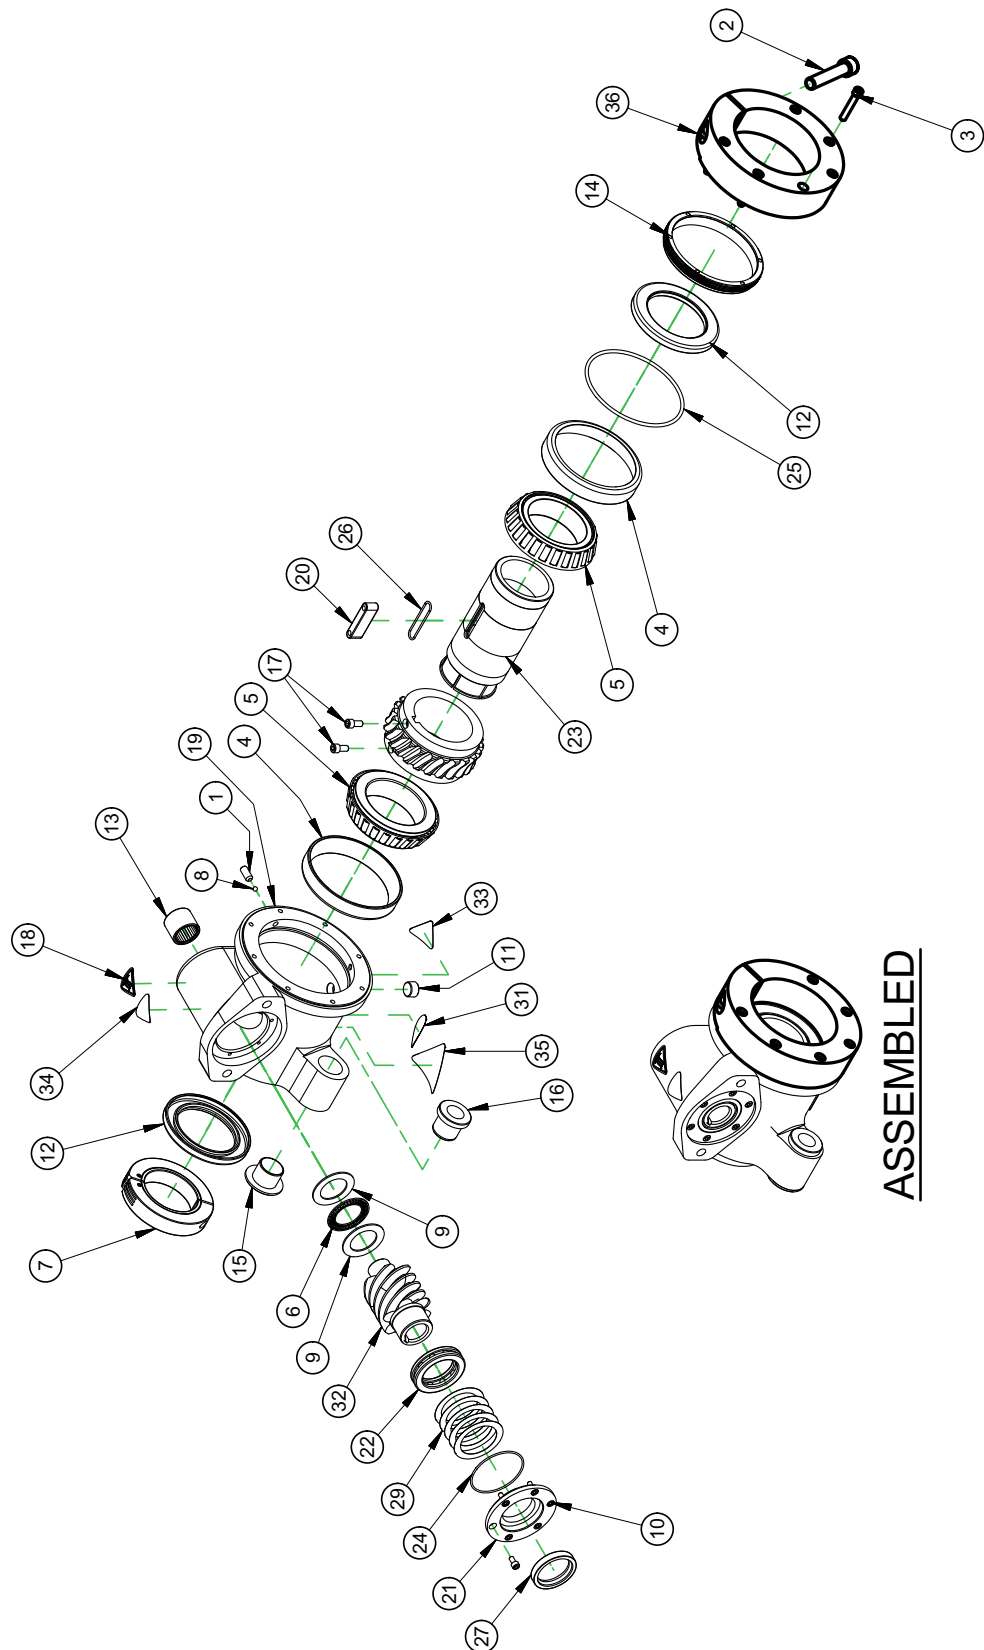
RDU NO MOUNT MODIFIED ASSEMBLY (P/N 93090)
